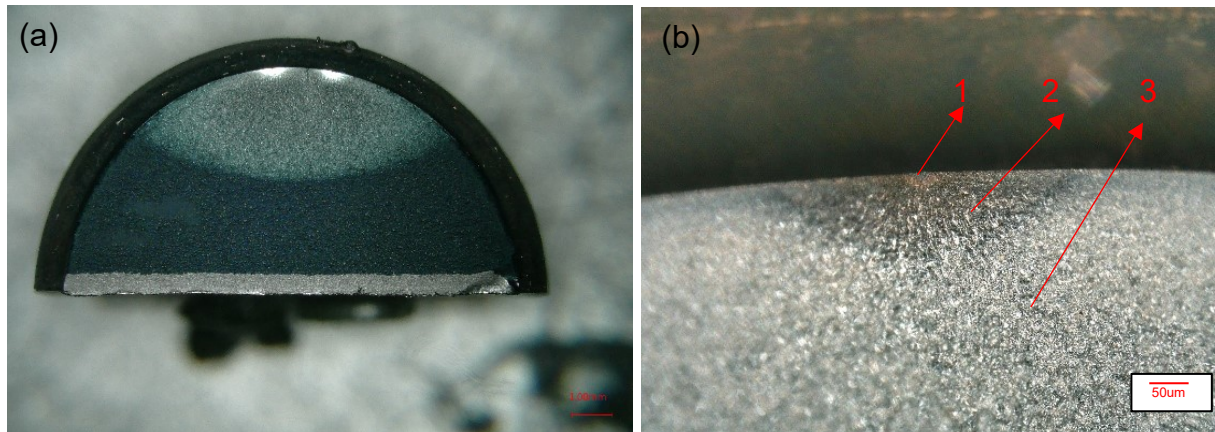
Optical images of (a) the fracture surface of the trail sample and (b) the three fatigue zones.
